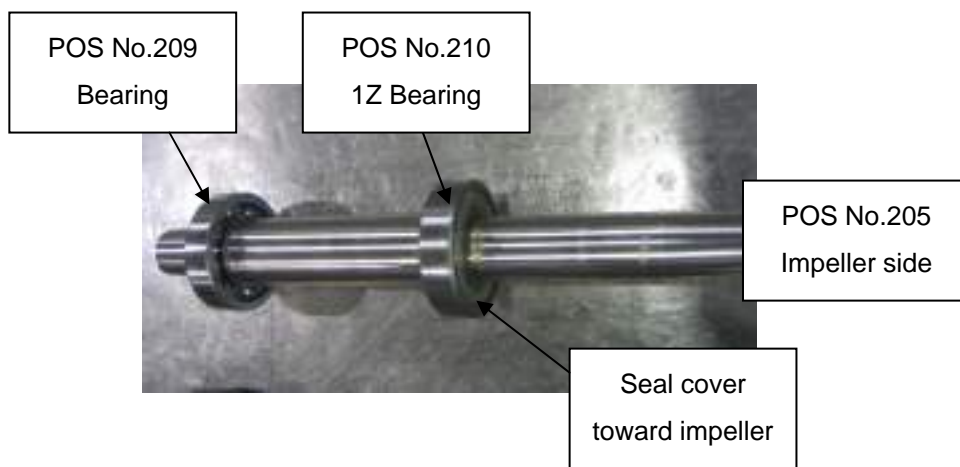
Bearings mounted on shaft (베어링 조립 위치)
